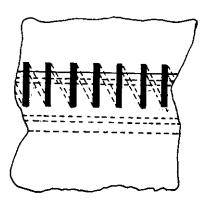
HAND STITCHING OF LENGTHWISE SEAM
